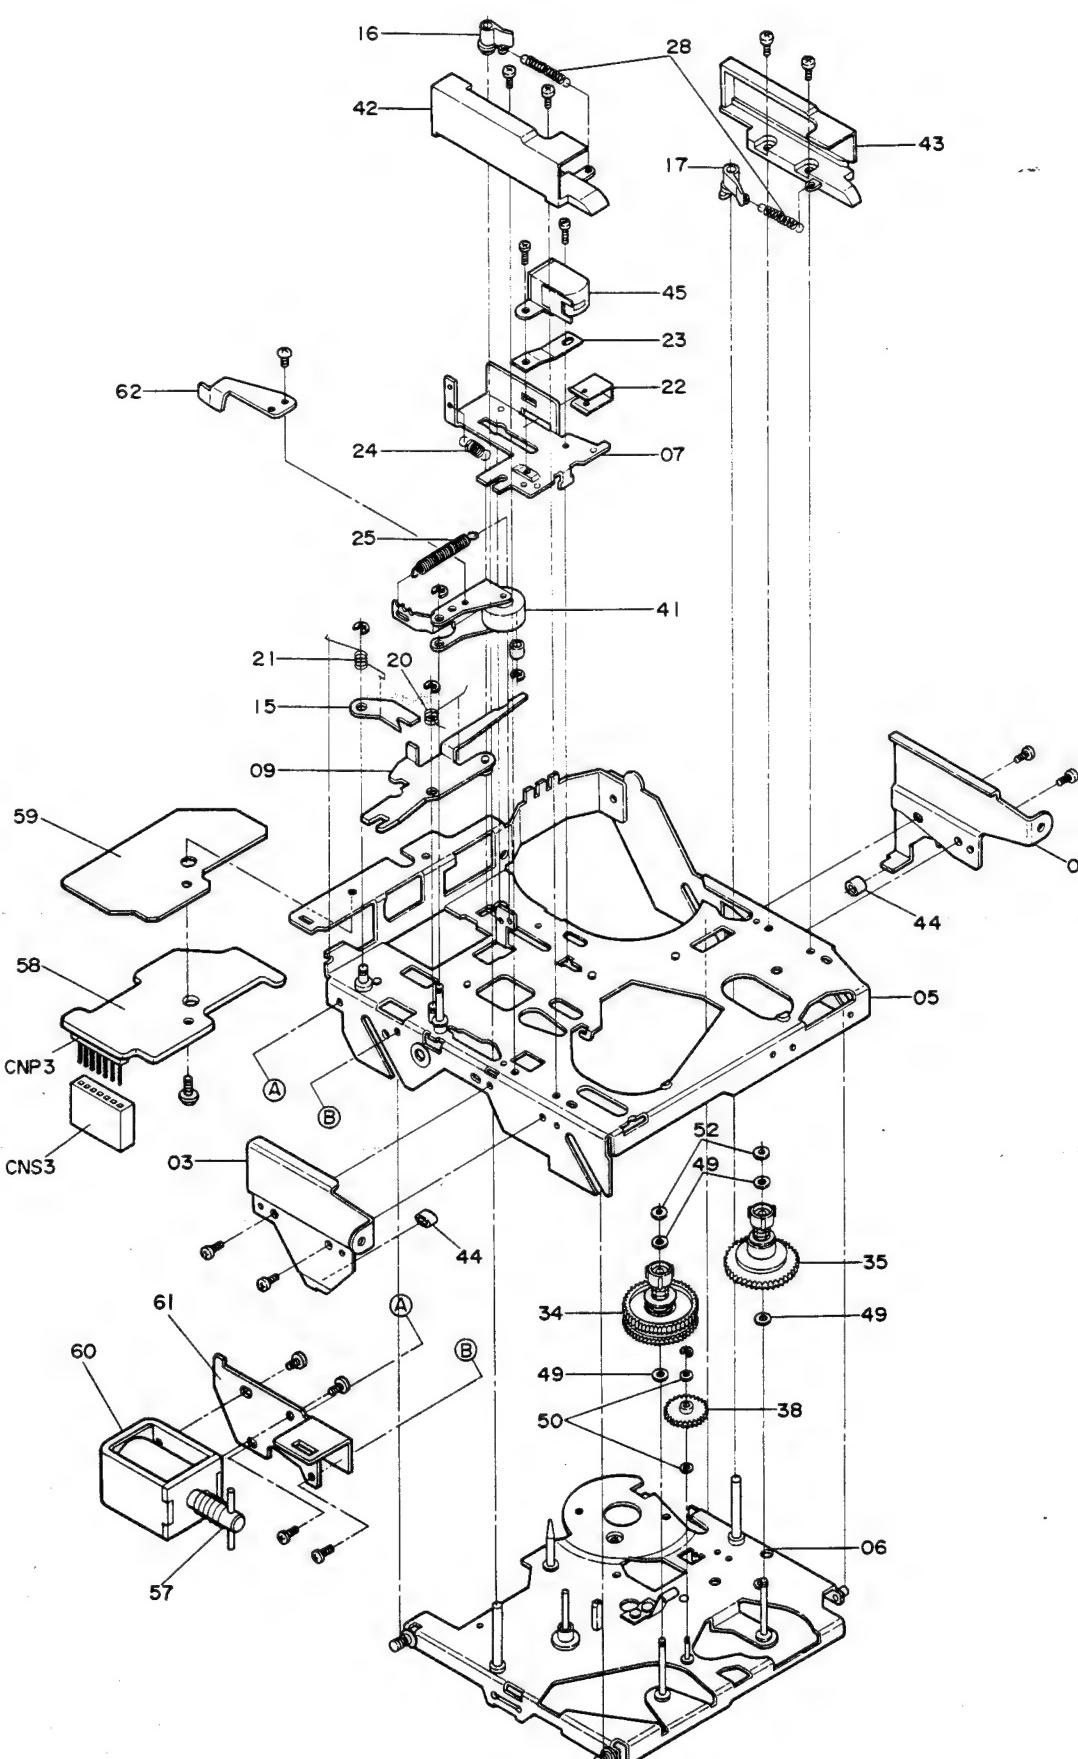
MECHANISM EXPLODED VIEW (UPPER SIDE)
